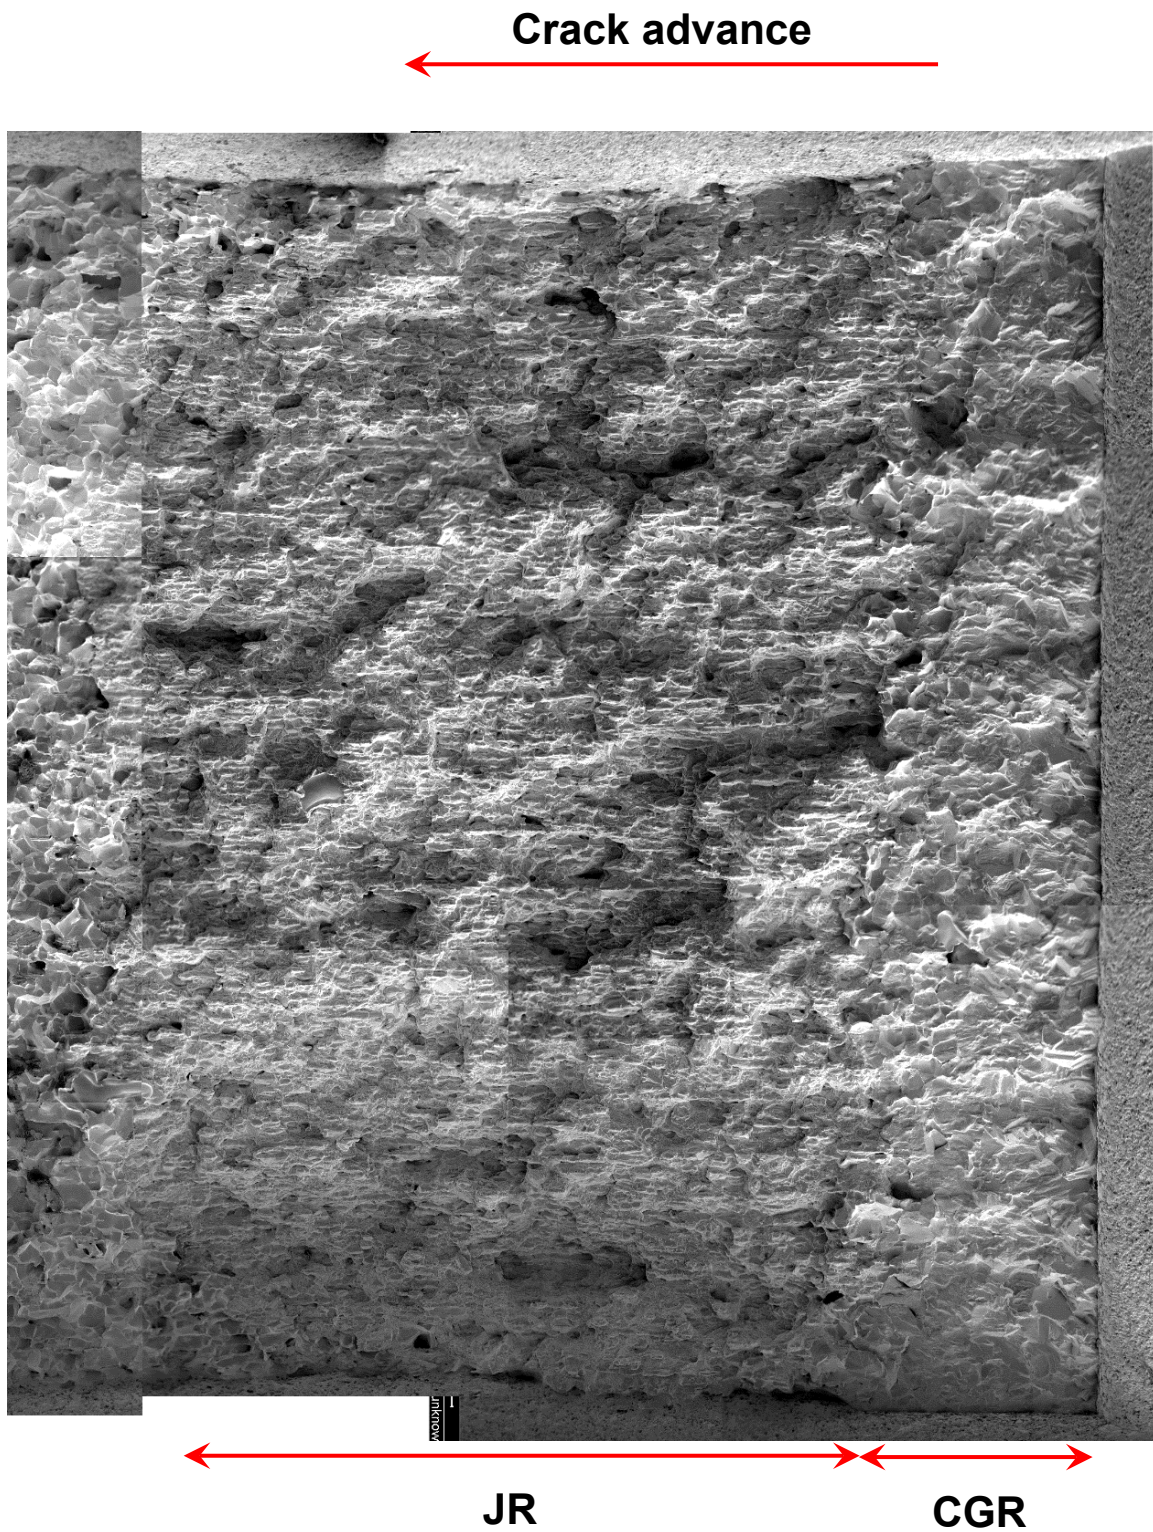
Fracture surface of Specimen B1CT07, ~39 dpa
